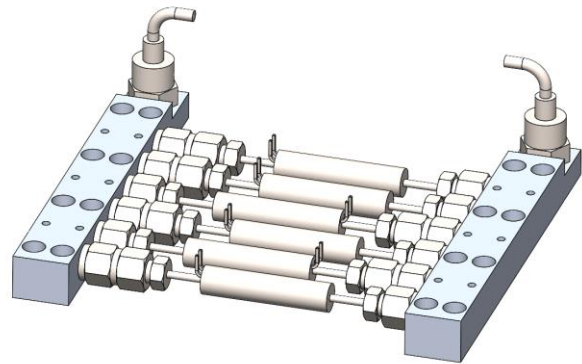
CAD image of Hamlet valve manifold, with pressure sensors at back.
